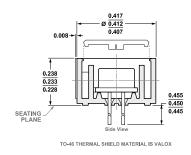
4-Pin TO-46 Thermal Shield Dimensions Shown in Inches
